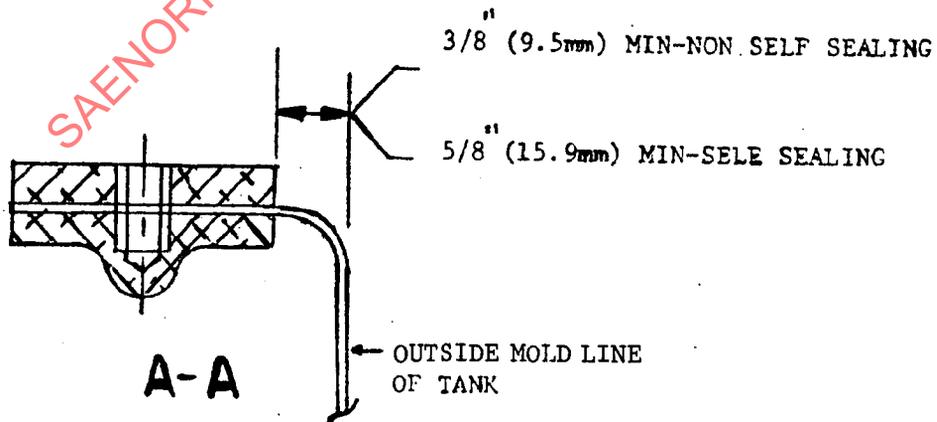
Recommended Dimensions for Fuel Tank Fabrication
